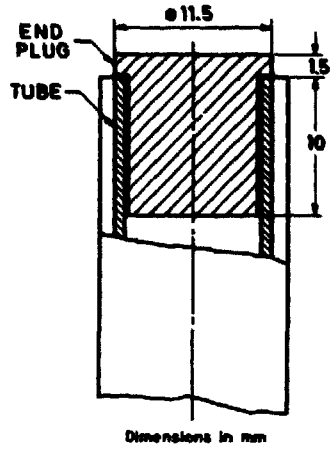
Aluminium end plug fitted to multifinned SAP tube. Ready for TIG-welding.
